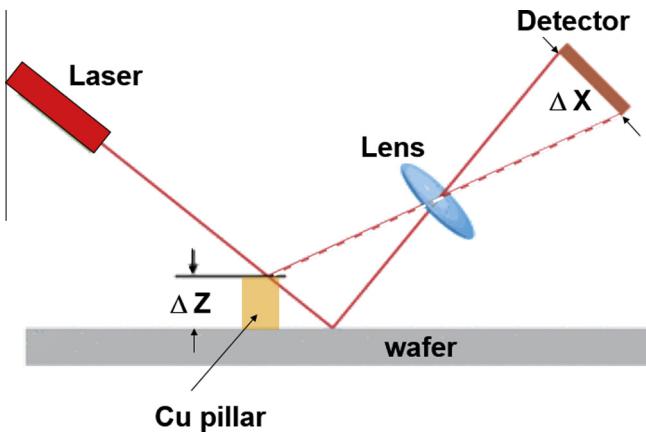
Schematic of laser triangulation measurement to determine solder bump height.
